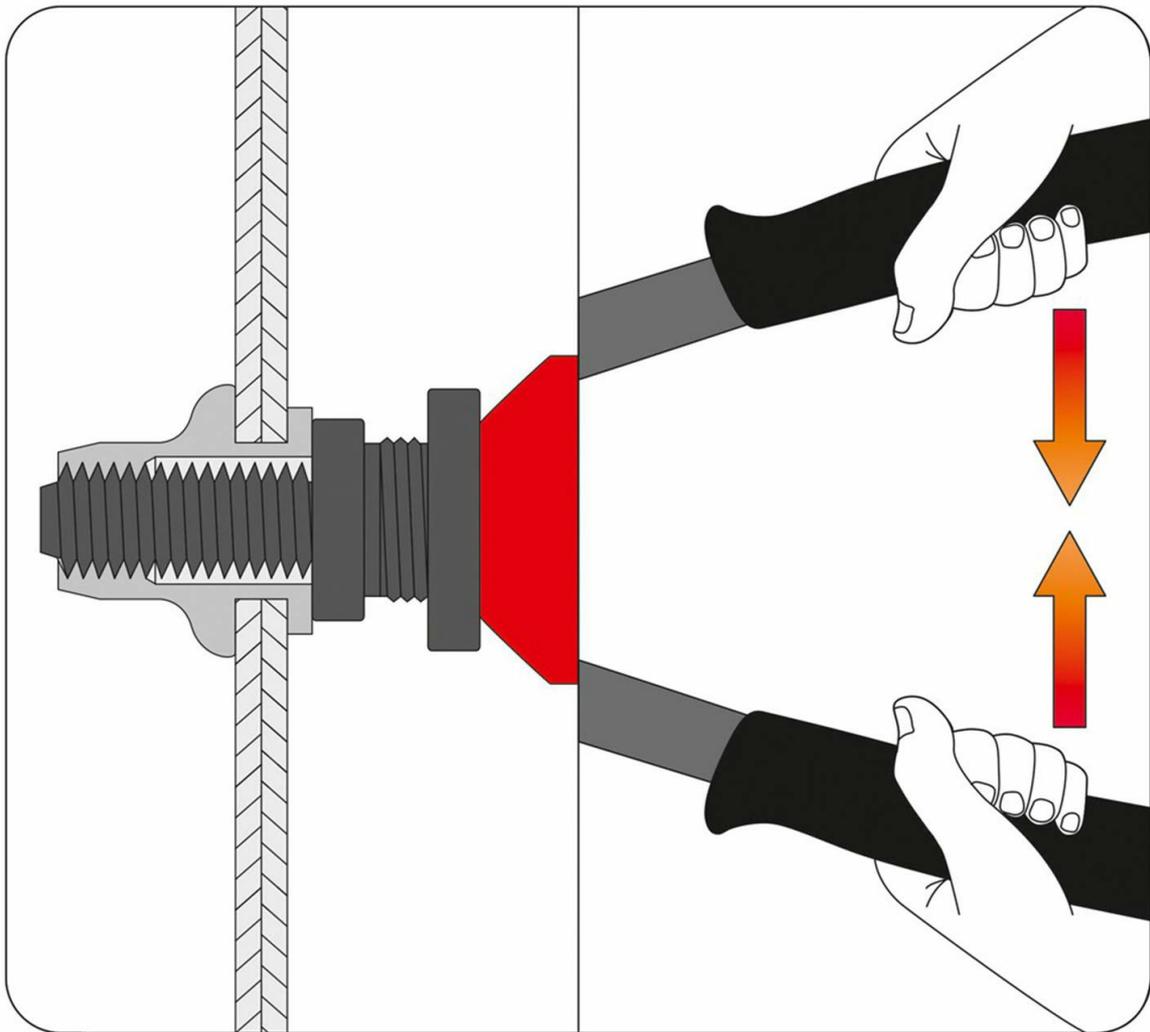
Diagram illustrating the process of setting a rivet nut with a hand riveter. The image shows the tool pulling the mandrel to deform the rivet nut against the material.
